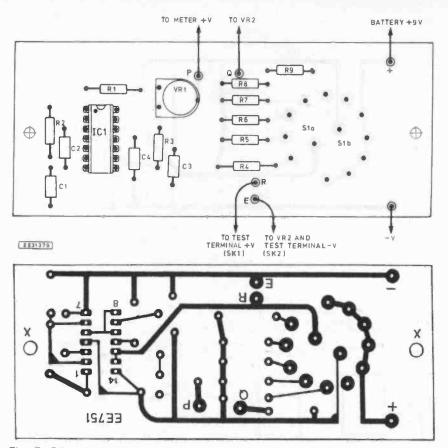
Printed circuit board component layout and full size copper foil master pattern.
